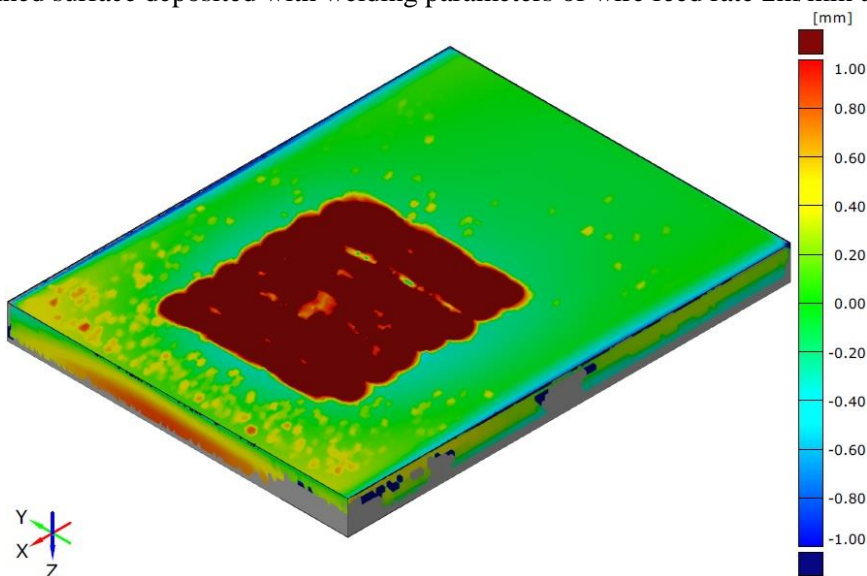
Scanned surface deposited with welding parameters of wire feed rate 2m/min and 19V
